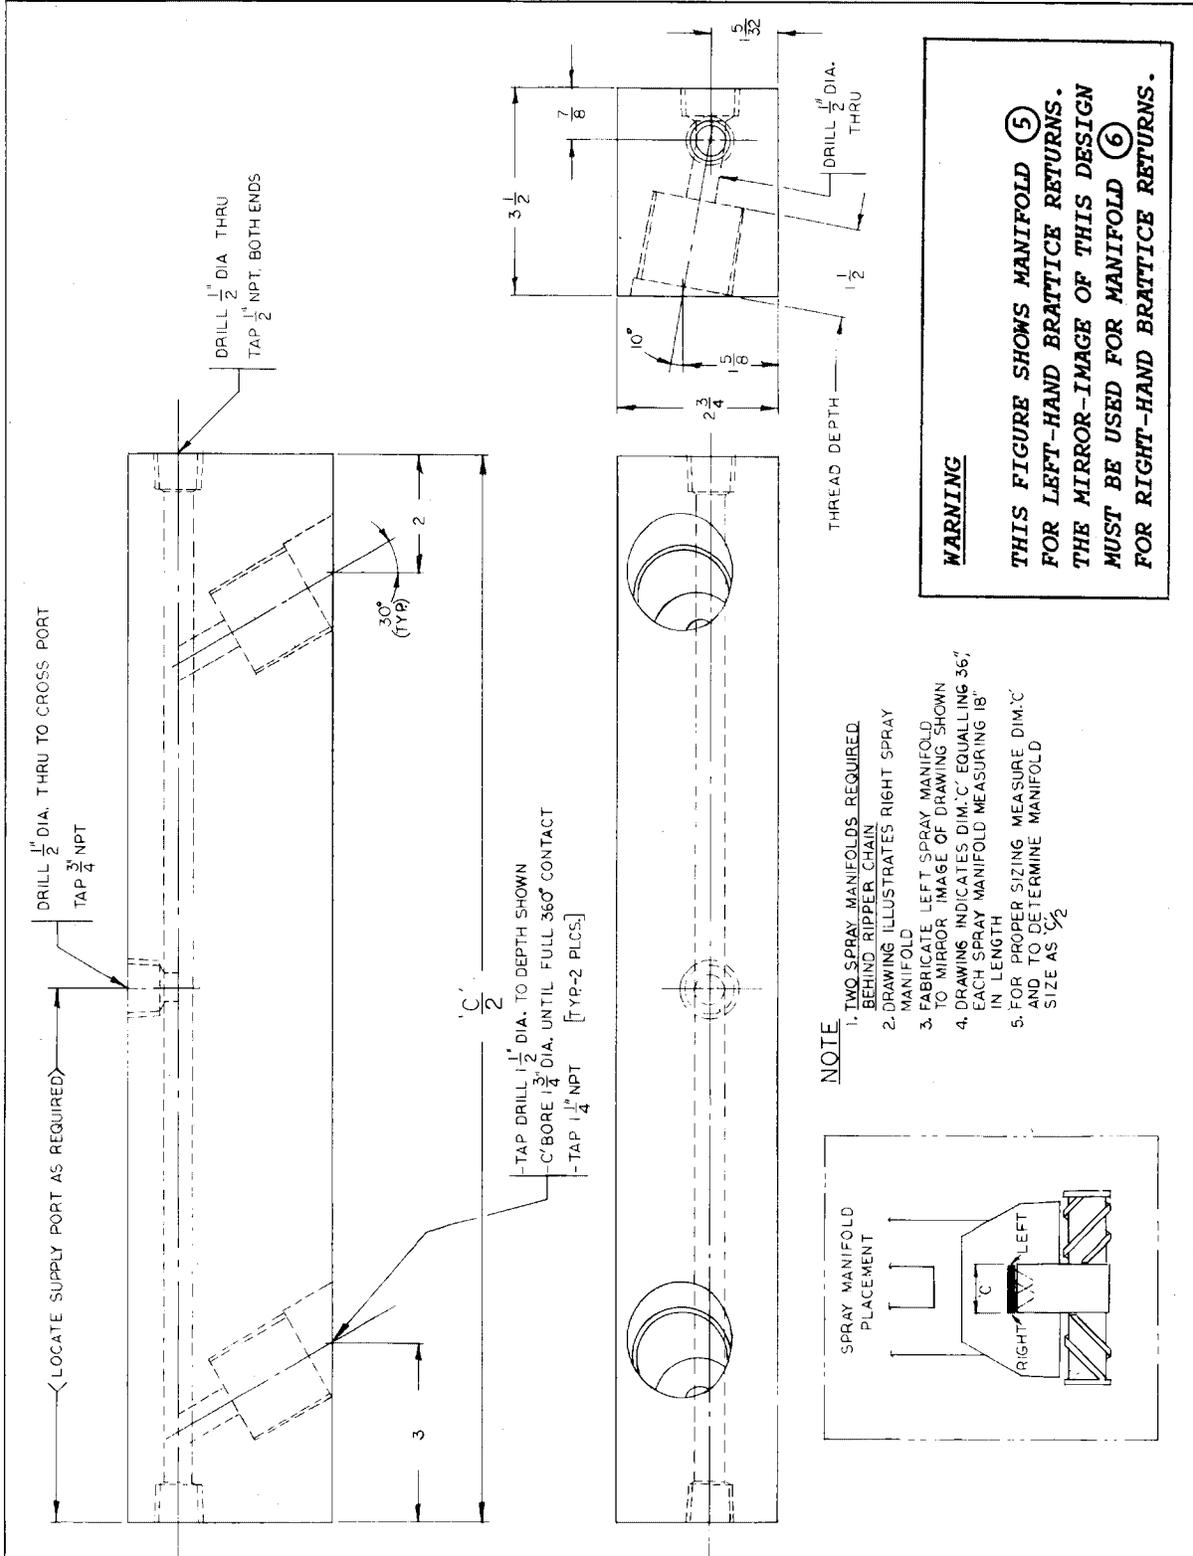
Front spray manifolds - ripper chain miner (behind center ripper chain).
